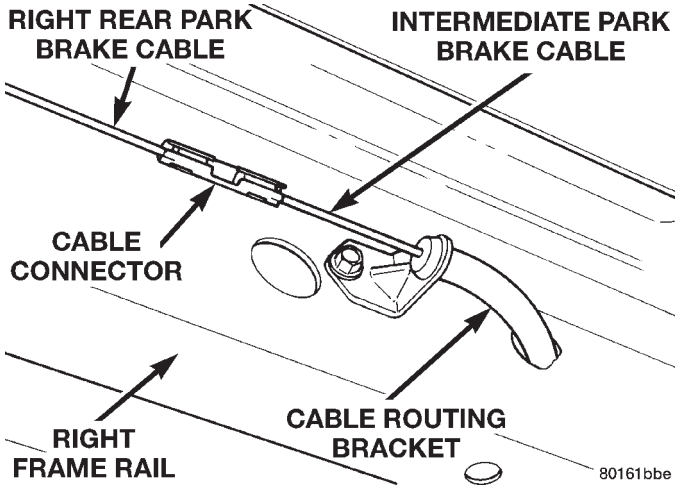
Right Rear Cable Connection To Intermediate Cable
